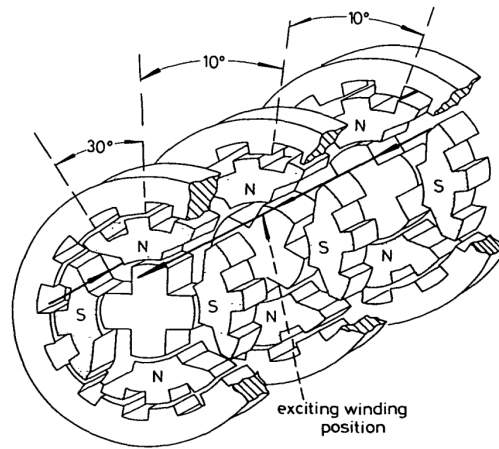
A multielement magnetic gear using three 4-pole elements [5].
